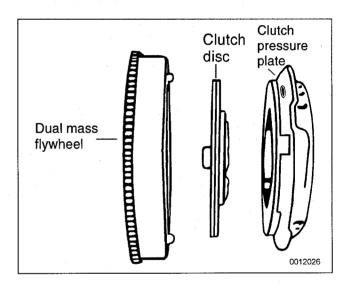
Clutch assembly. Note clutch disc hub position during installation.
